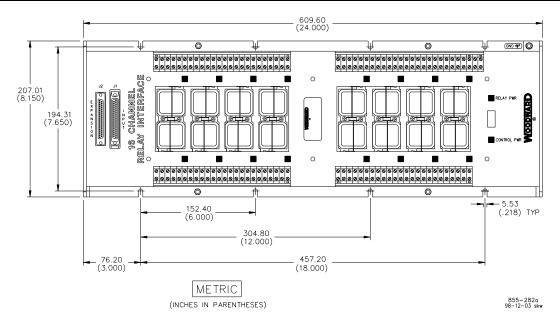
16 Channel Relay Module Outline Dimensions
